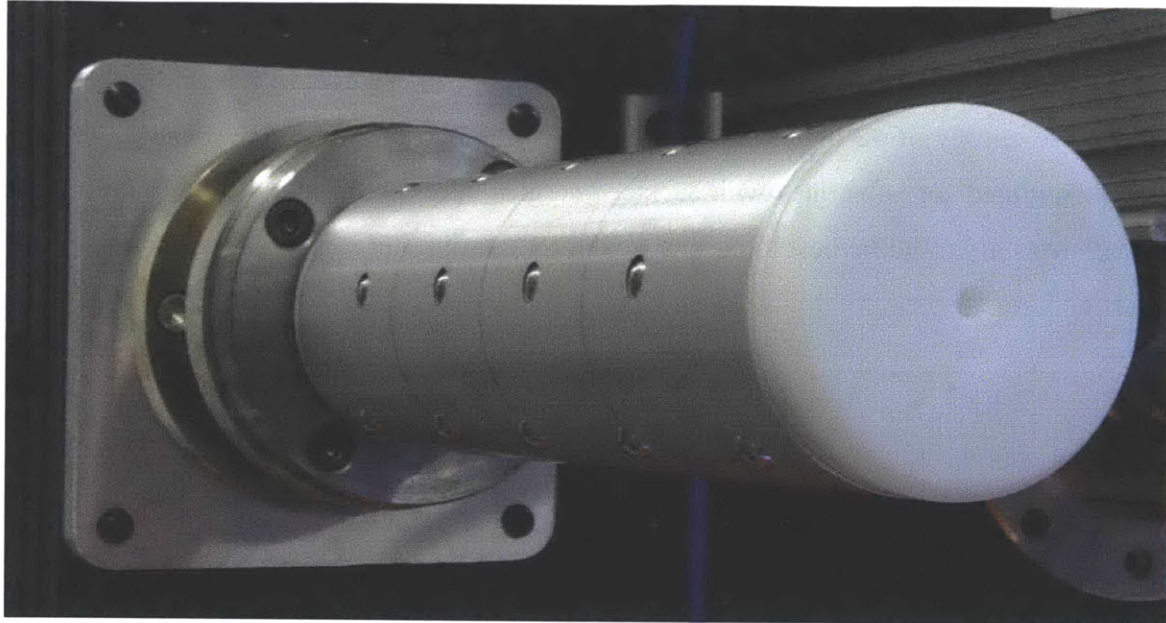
The unwind and rewind reels are expanding-shaft safety chucks. The balls visible in this roller expand outward to securely grip the material roll core for torque transfer
